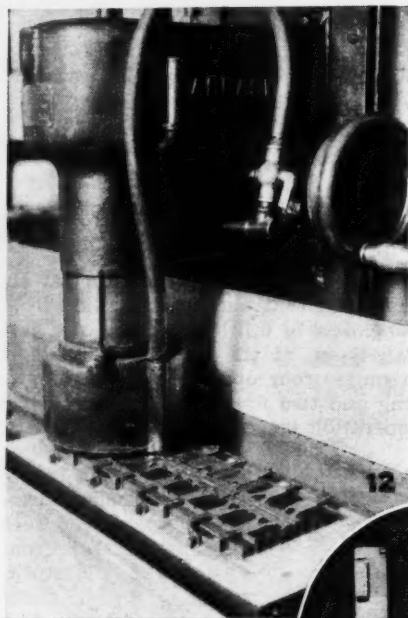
Grinding slides for spacebands, using Abrasive Surface Grinder. Both work and fixture are held by the magnetic chuck. Fig. 13—A "matrix" of a capital letter "X."
